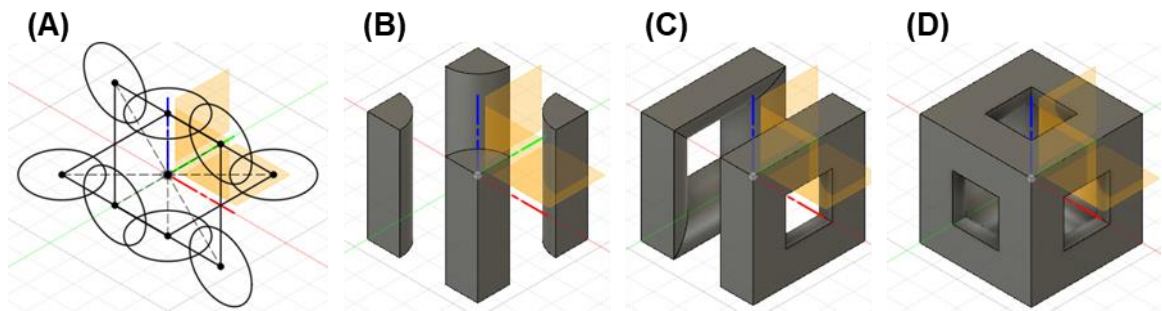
(A) 2-Dimensional cross-sectional sketches used to create a cubic unit cell in Fusion 360. (B) X-Y sketch extrusion into 3-dimensions. (C) X-Z sketch extrusion into 3-dimensions. (D) Y-Z sketch extrusion into 3-dimensions.
